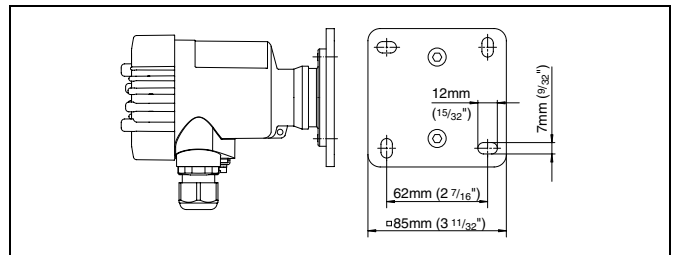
VEGADIS 61 for wall mounting, bottom view of mounting plate.
